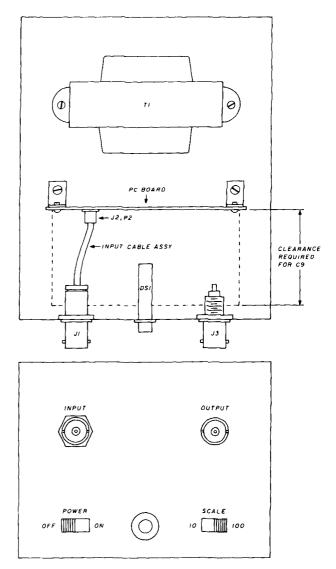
Suggested layout for complete prescaler. Wiring to and from the PC board is shown in fig. 5.
